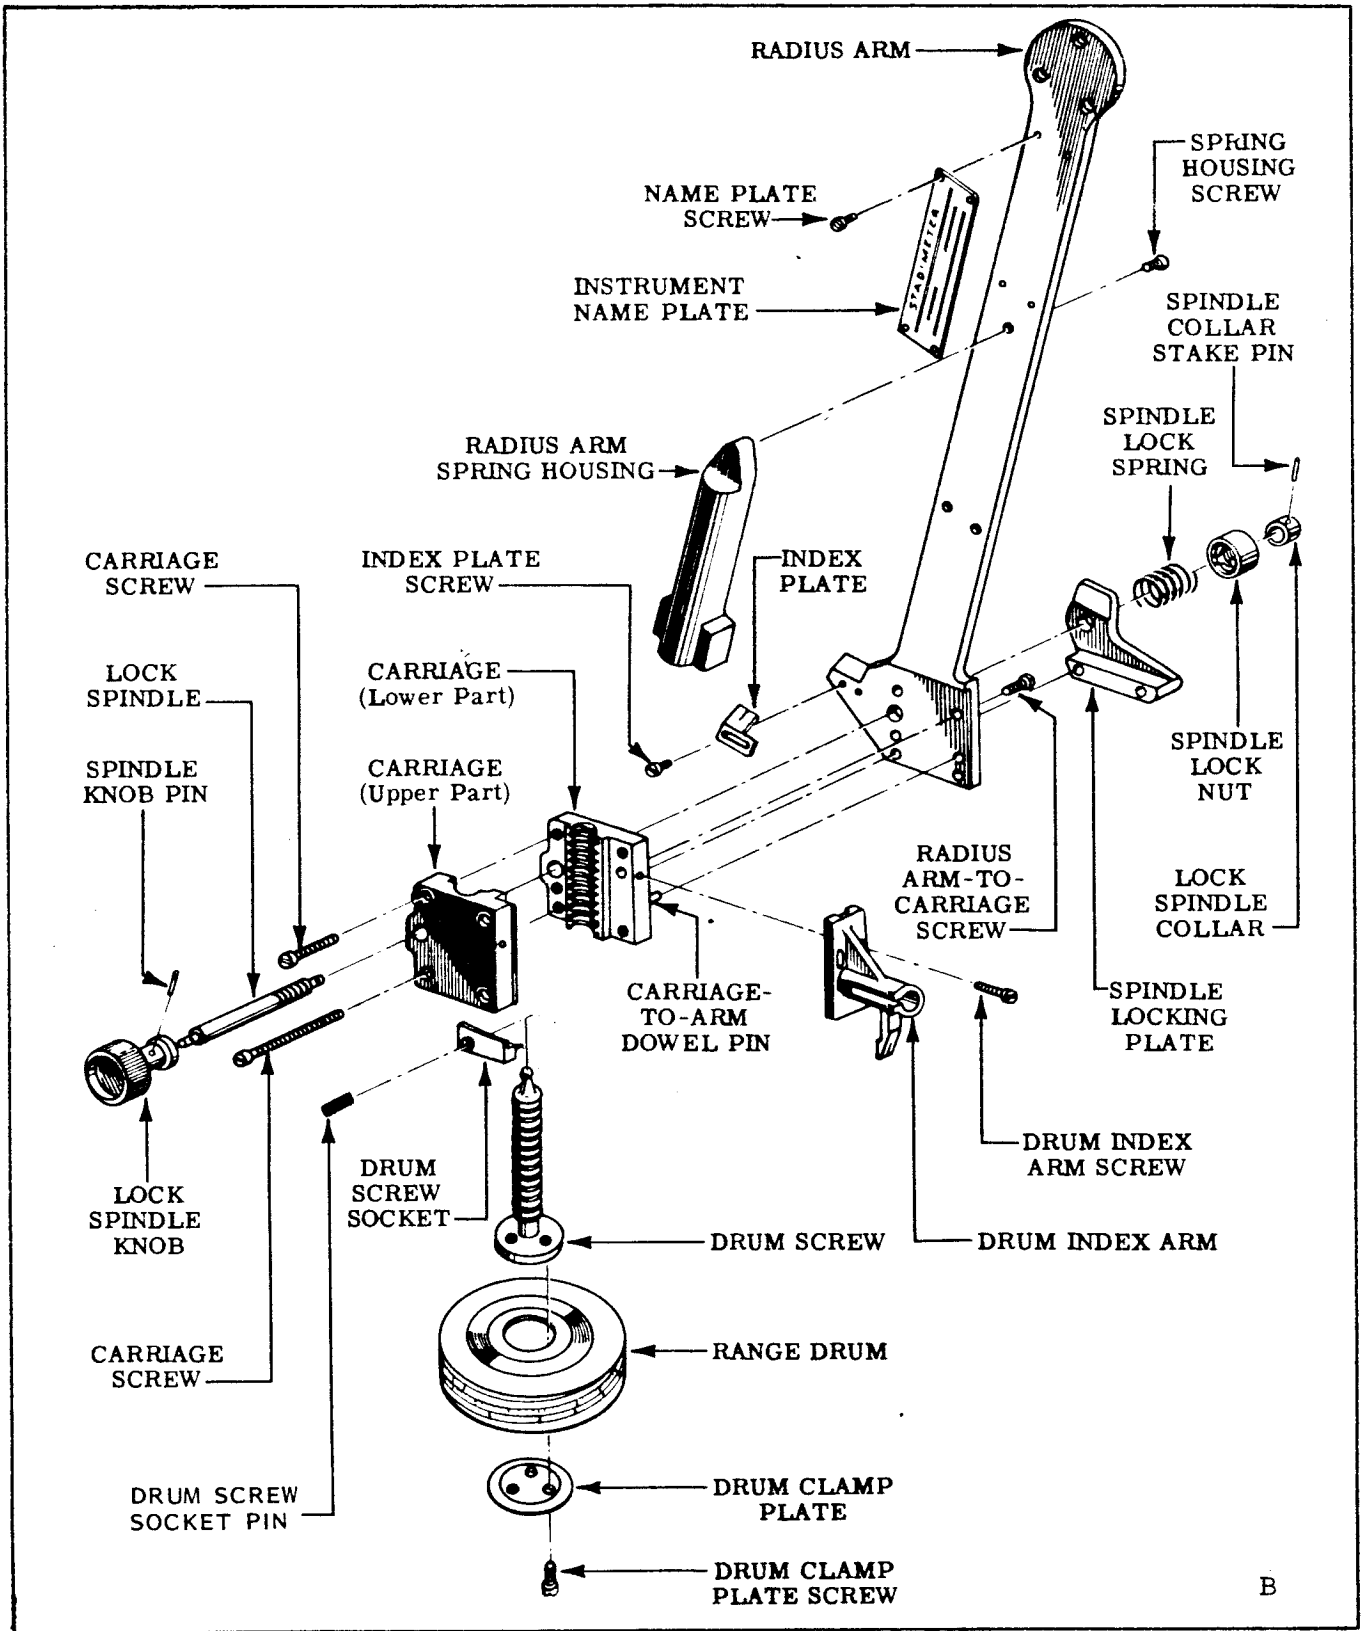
Disassembling the Lock Spindle, Carriage, and Radius Arm Assembly (Sheet 2 of 3)
